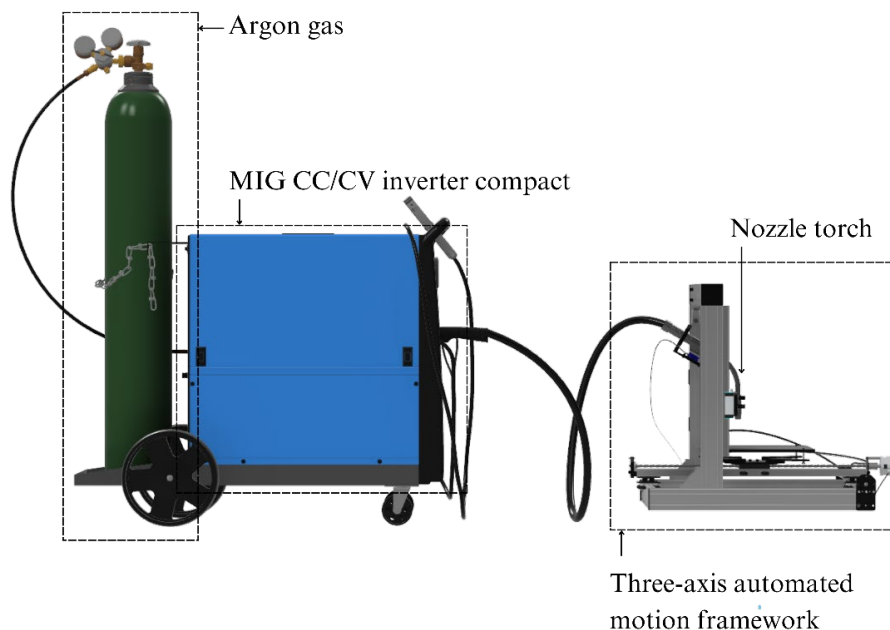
Wire arc additive manufacturing machine with three axis motion.
